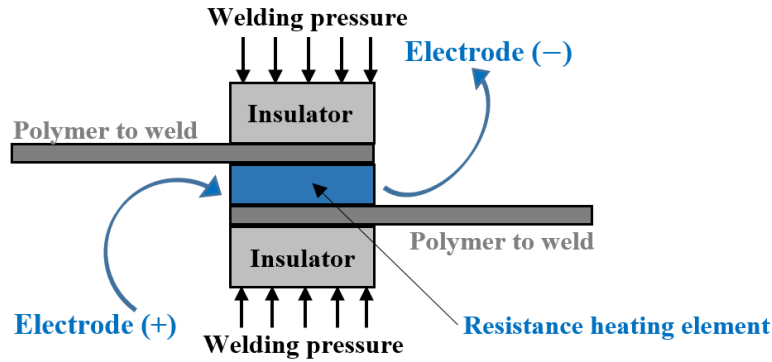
Schematic of a resistance welding process for a lap shear coupon.
